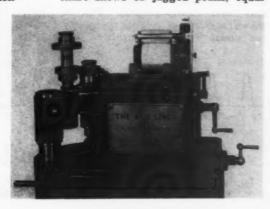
The Master Gear is held to the driving spindle and the gear to be tested is held on a fixed stud.
